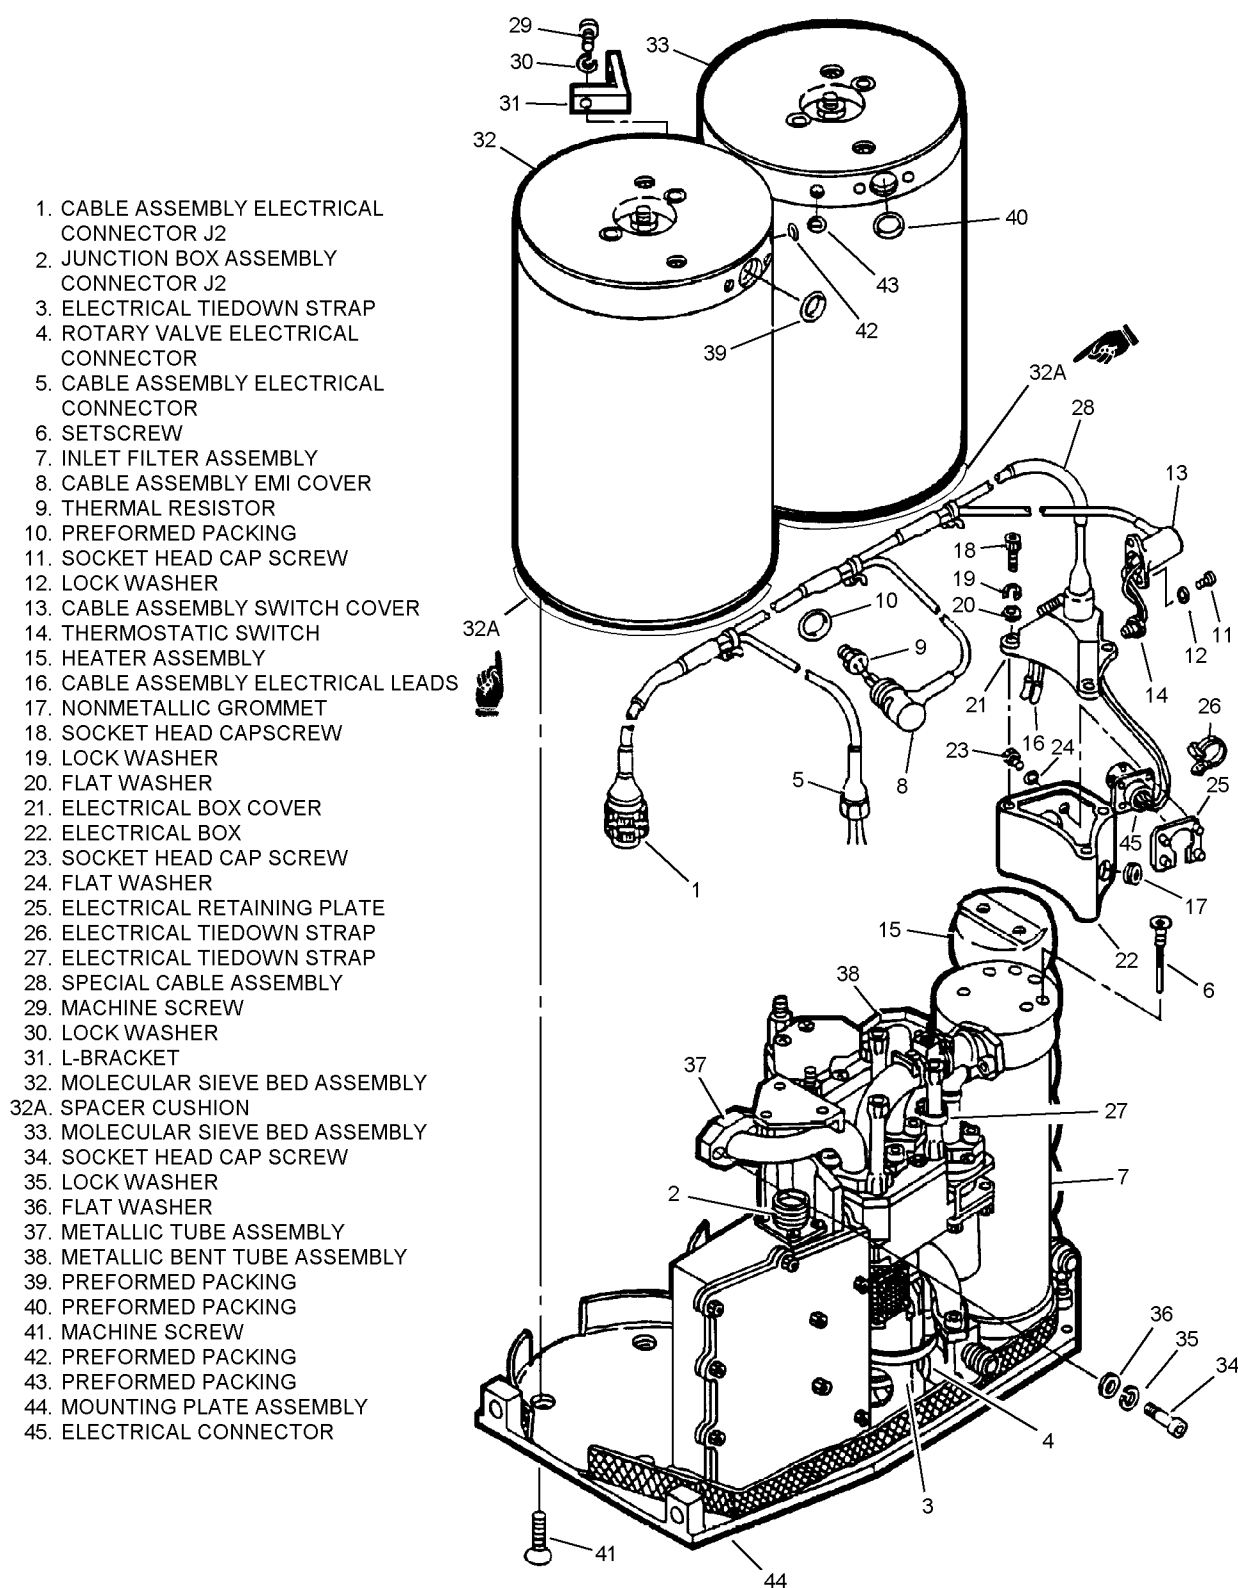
Special Cable Assembly/Sieve Bed Removal/Assembly
